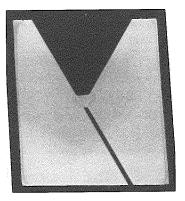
Cross sectional photo of Y-groove weld cracking test, [4.20]
